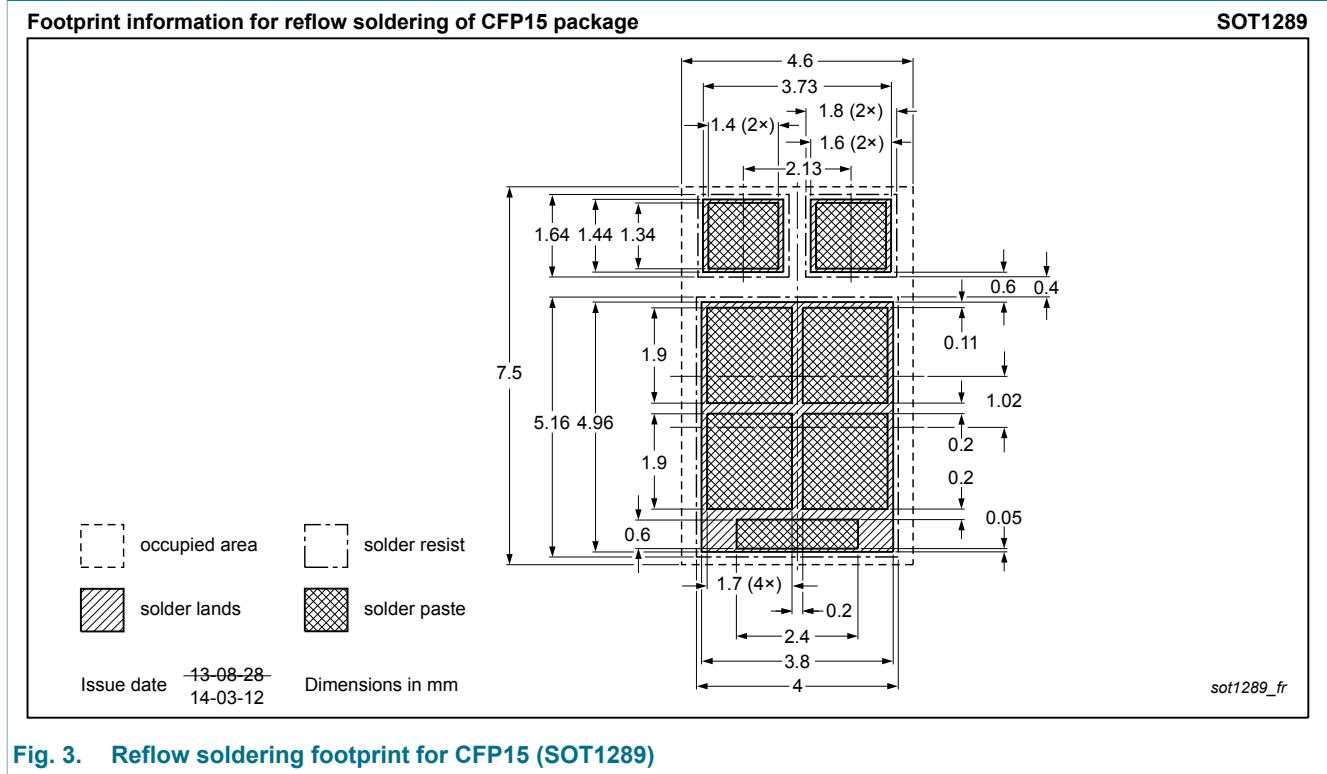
Reflow soldering footprint for CFP15 (SOT1289)
